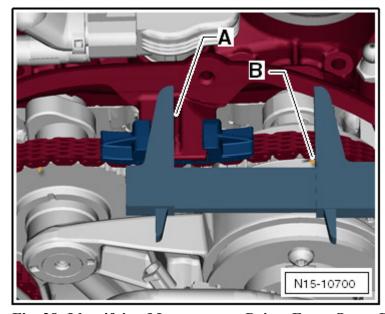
Identifying Measurement Points From Outer Edge -A- To Mark -B-
